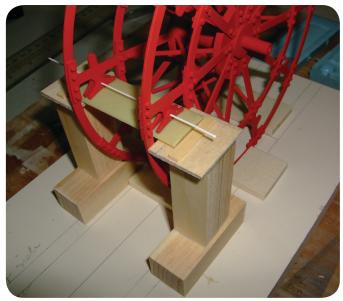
The jig built to align the wheel frame with the bucket for their attachment.
